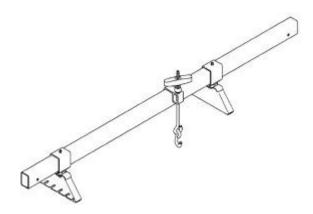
Engine Support Tool #8534B Courtesy of CHRYSLER LLC
